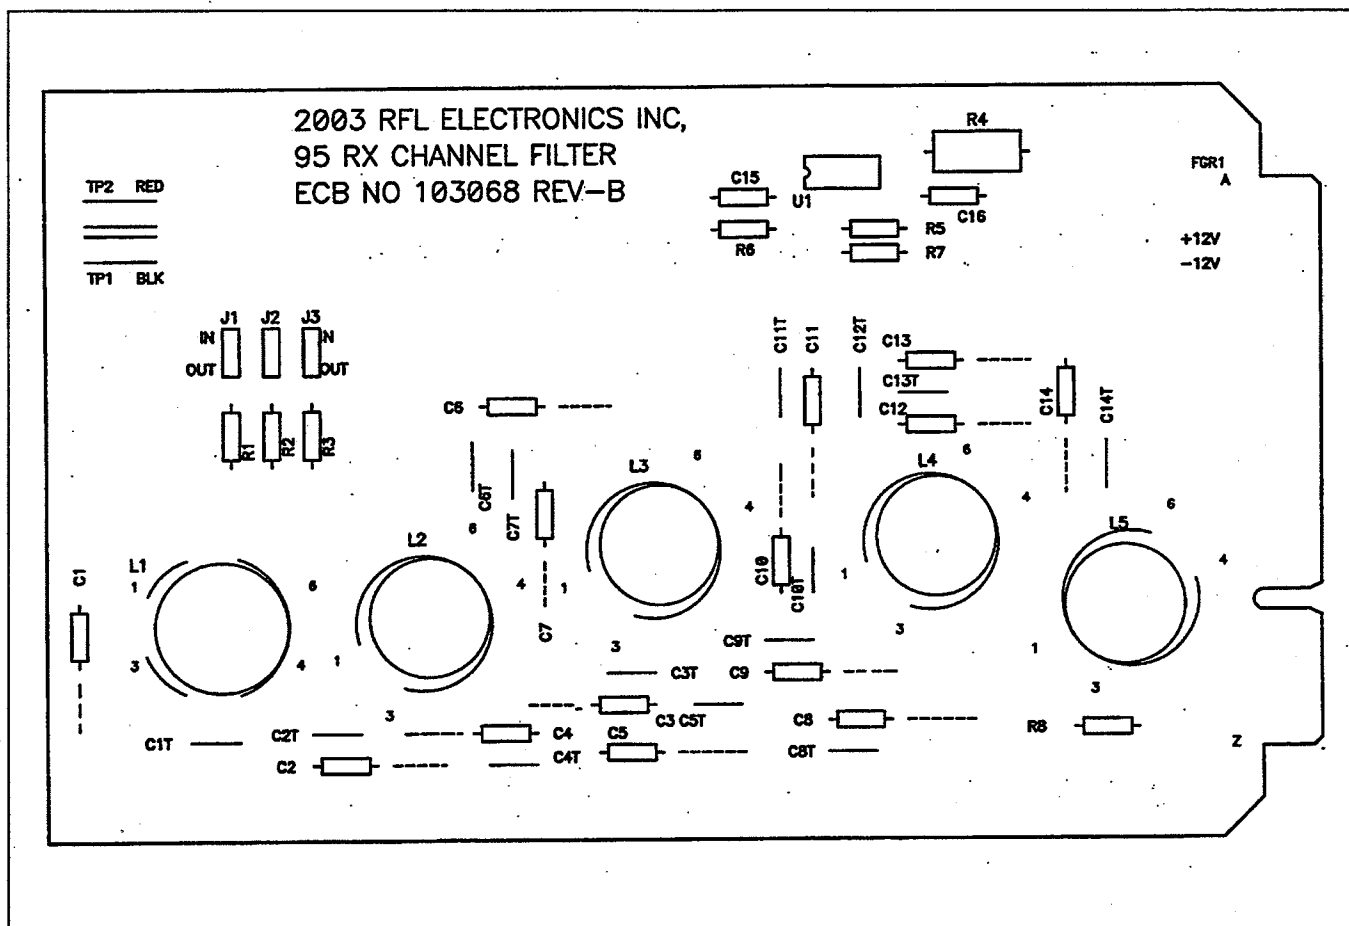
Component locator drawing, 95 RX Channel Filter (Drawing No. 103065-X)
